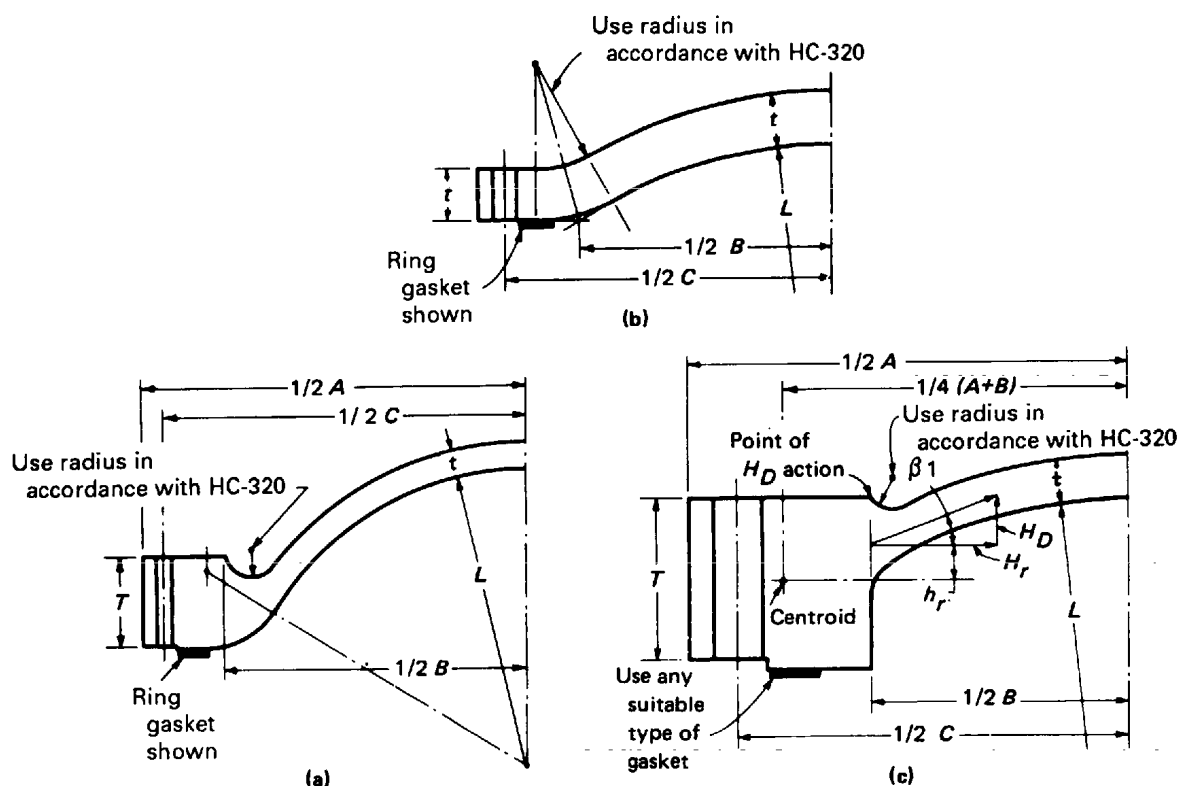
SPHERICALLY SHAPED COVERS WITH BOLTING FLANGES
